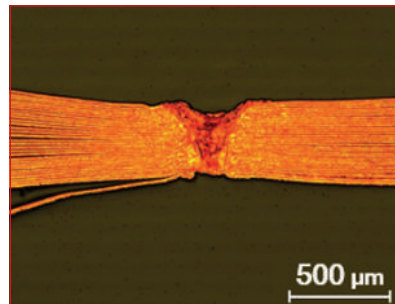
Cross-section of a laser-contacted foil stack. Using green laser radiation, a more stable welding process is enabled when joining the battery foils. ■
